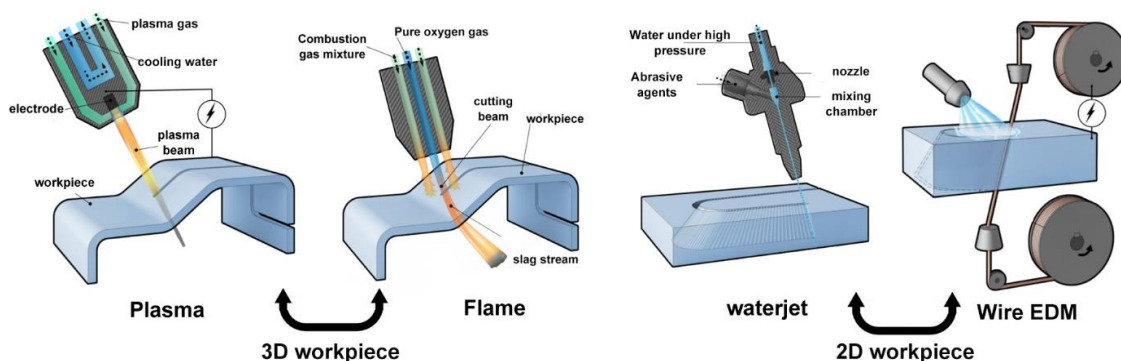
Shows the limited ability of a 3-axis CNC machine (cutting 3D structural workpiece and cutting 2D flat workpieces in 3d rotation)
